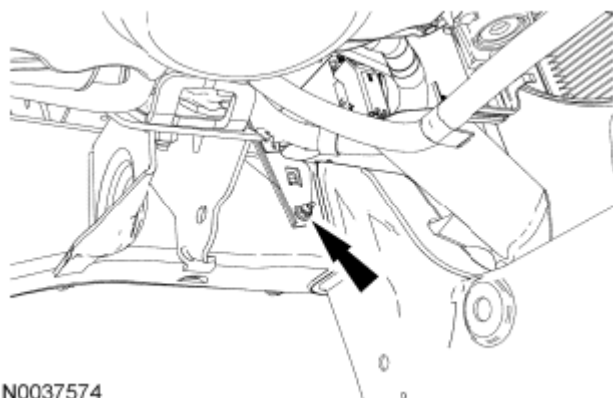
Locating Battery Cable Harness Bracket And Nut
